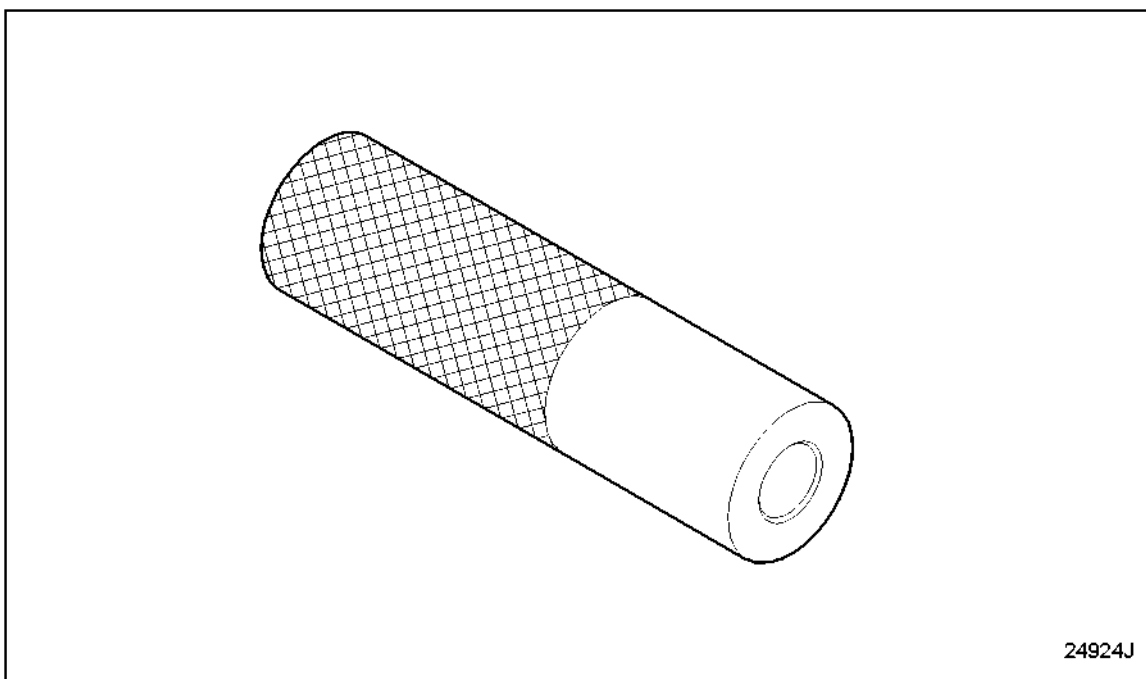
Valve Stem Seal Installer (4Valv),J 35373
